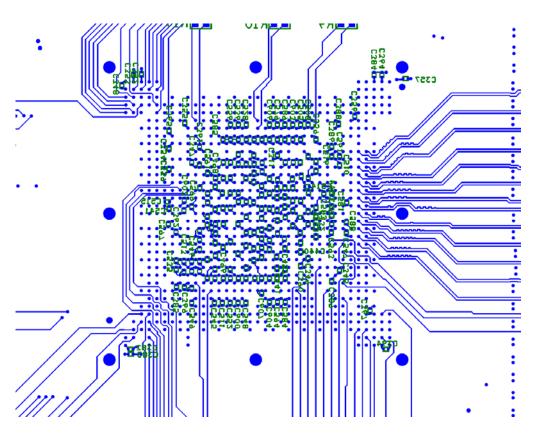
Bottom Layer BGA Layout, Escape, and De-coupling Capacitor Placement
